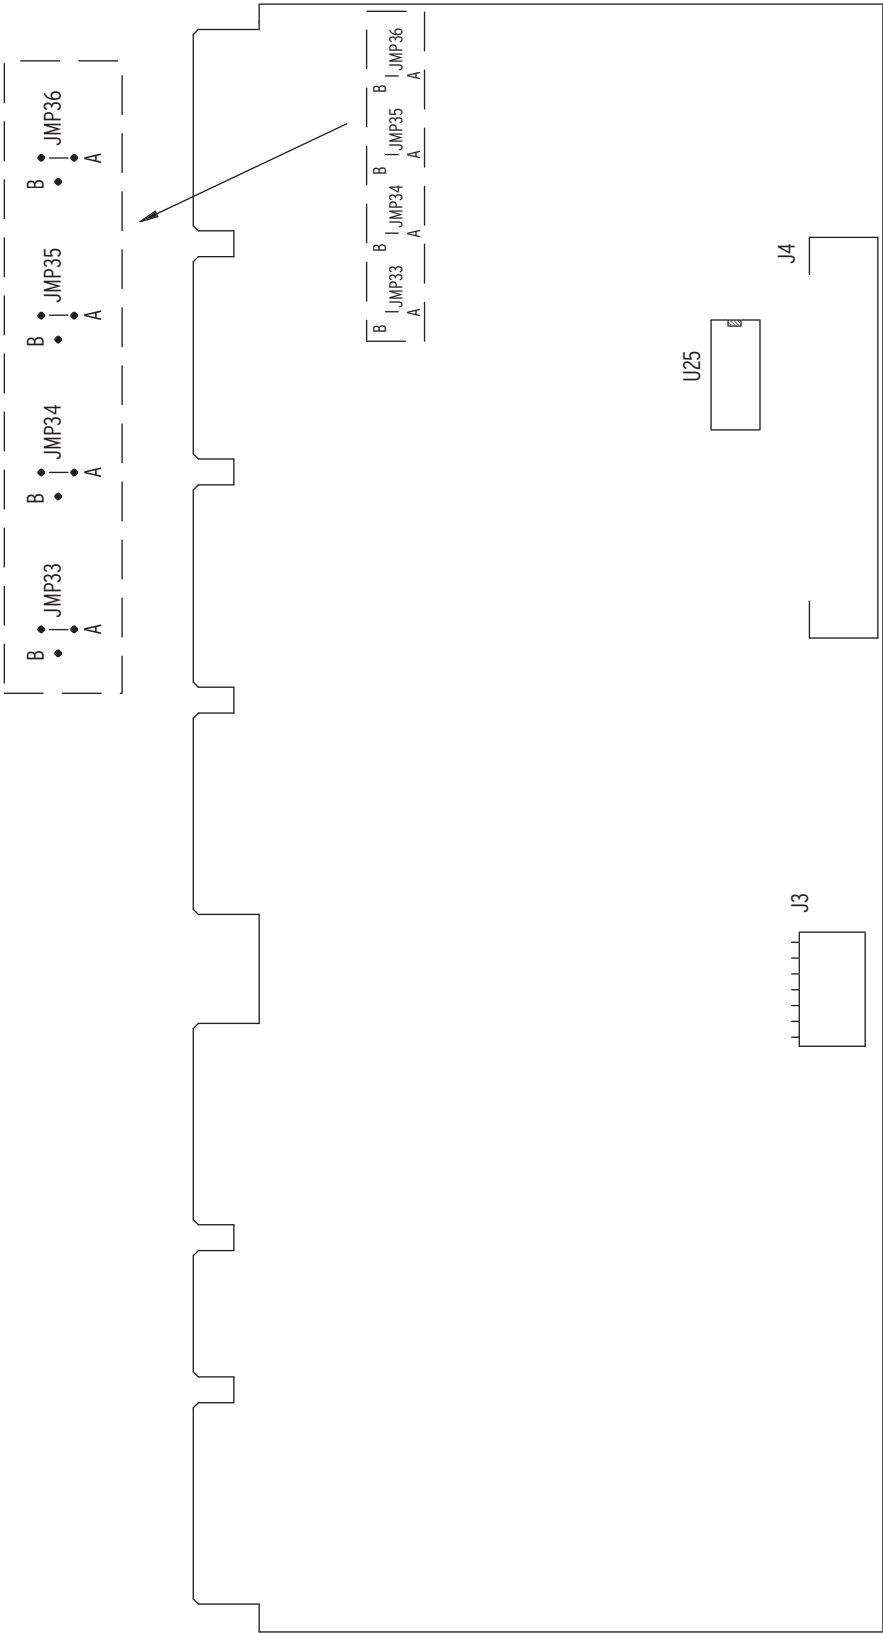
SEL-2030 Optional I/O Board Jumper Location
